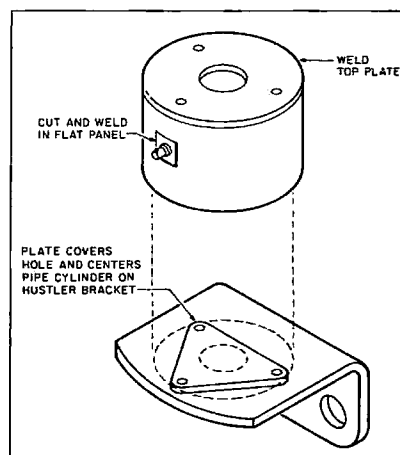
Lower plate covers hole in bracket and aids in centering the enclosure cylinder.
